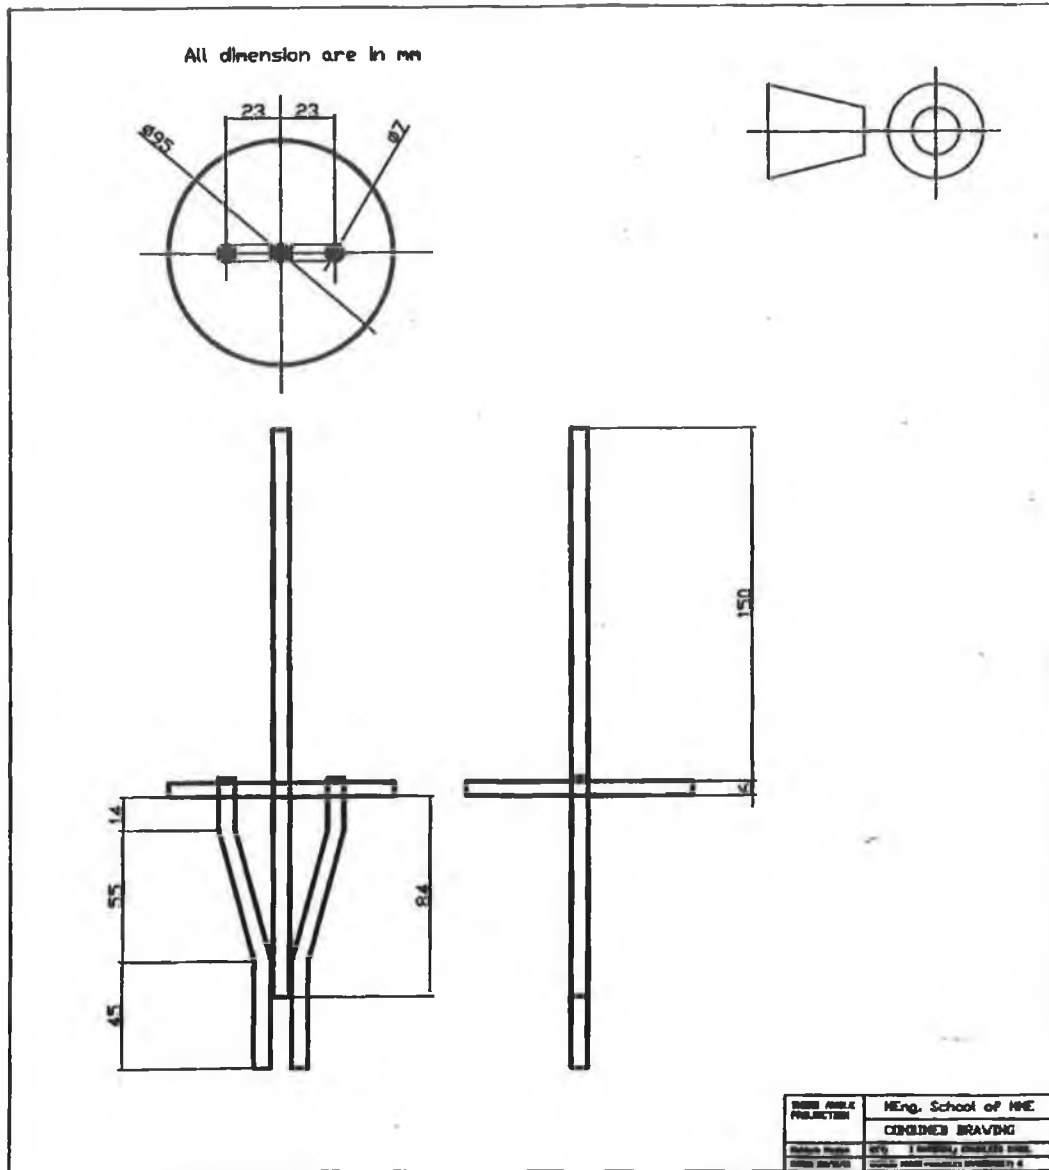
Combined drawing of the base plate, the inlet pressure tube and the powder flow tubes.
